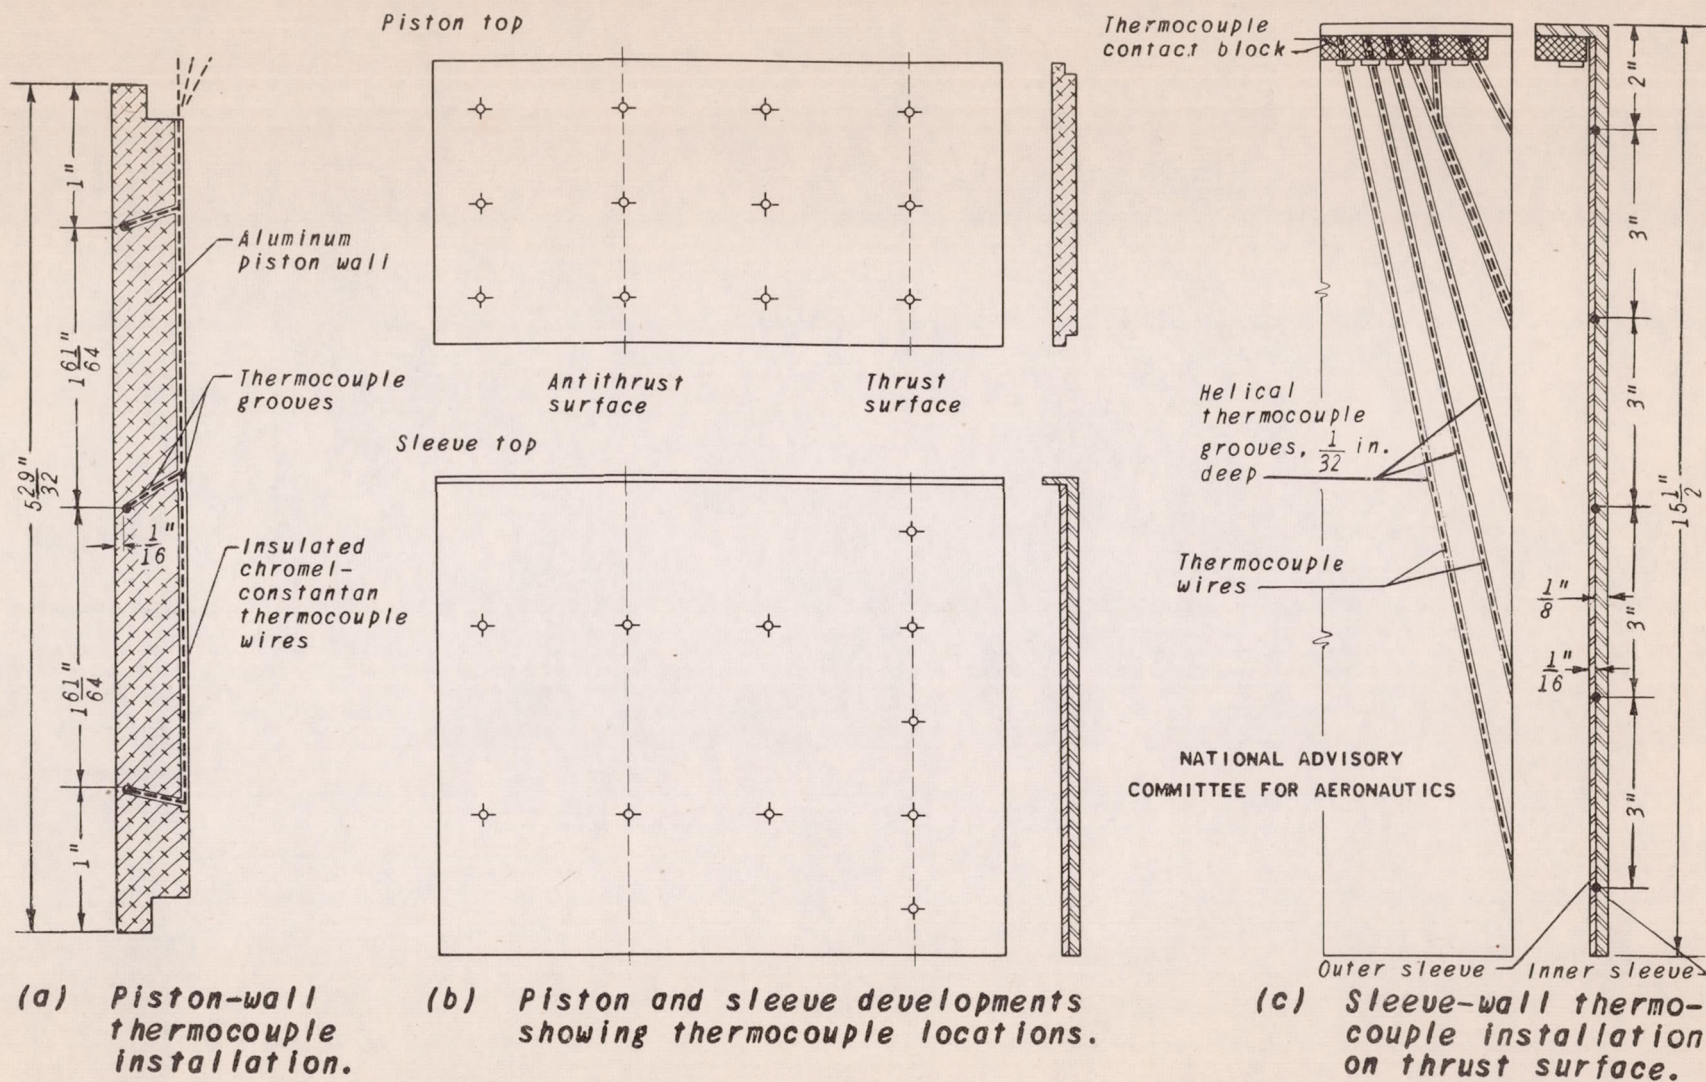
Locations and installation details of piston and reciprocating-sleeve thermocouples.
